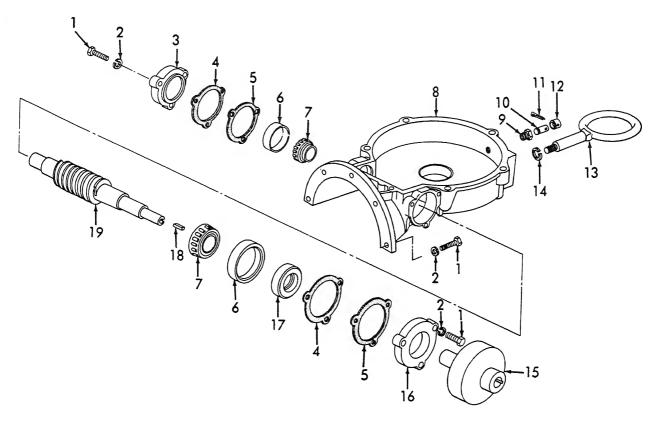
Drive Assembly, Oil Breather, and Lifting Bolt.
